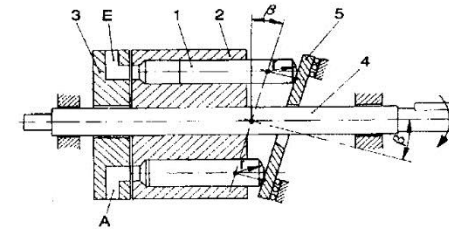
Axial piston pump of swash-plate design with spherical cap piston (1) Piston (2) Cylinder-block (3) Valve plate (4) Drive shaft (5) Swash-plate. E inlet, A outlet.
